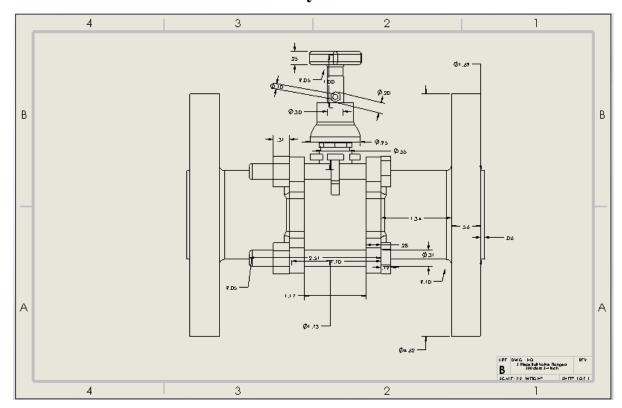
2-Dimensional Sketch of Assembly (Front View)
